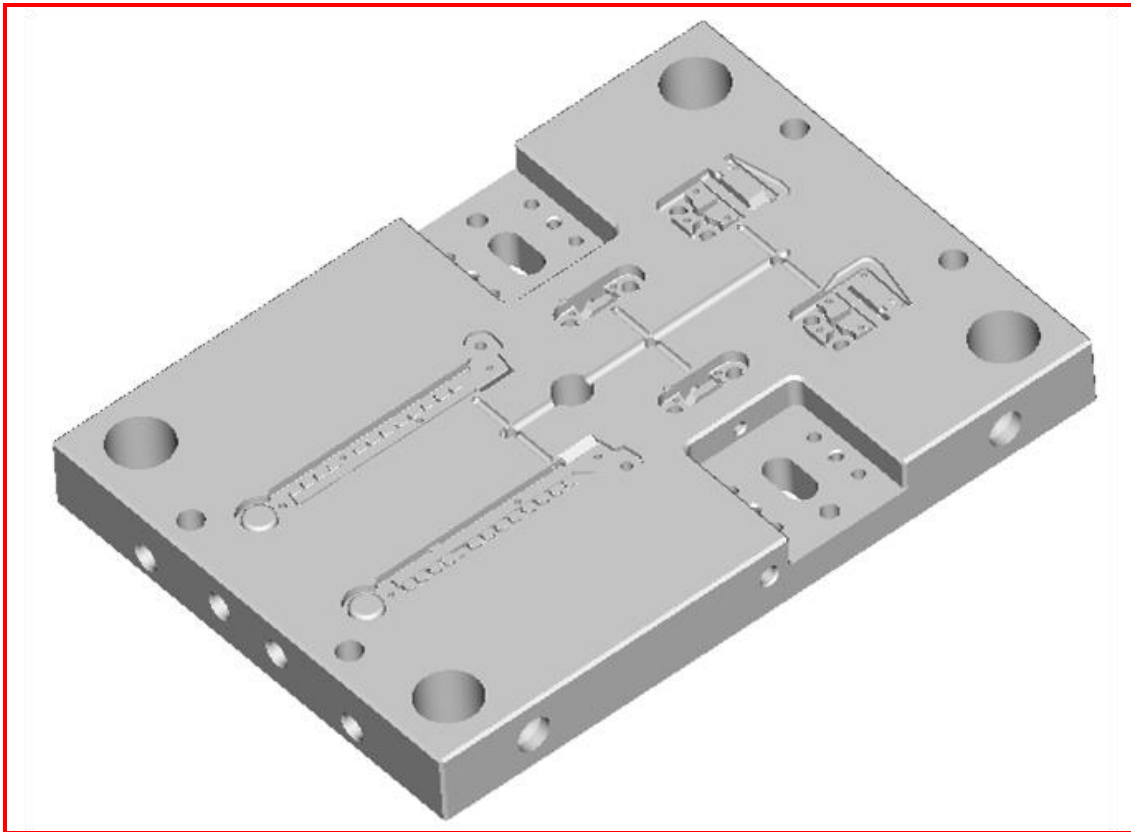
Three-dimensional model of the part mold "Movable die half".
